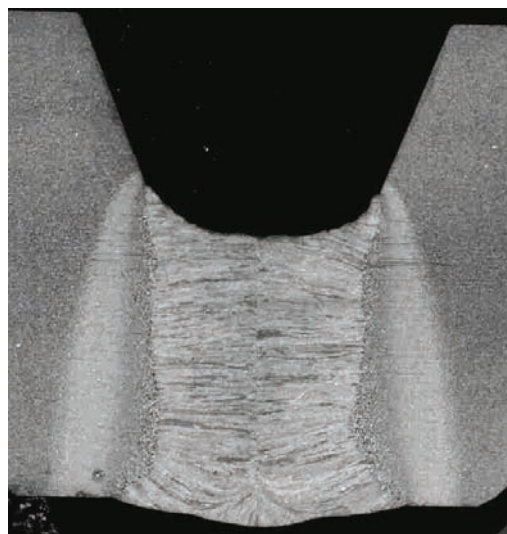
Two-sided No Back Gouge Weld, 34/66-60 Hz – One Pass per Side – Macro - 2.5X Mag
